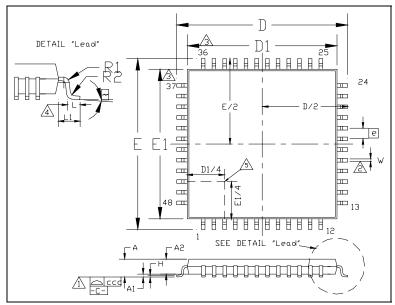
COM20022I 48 Pin TQFP Package Outline
